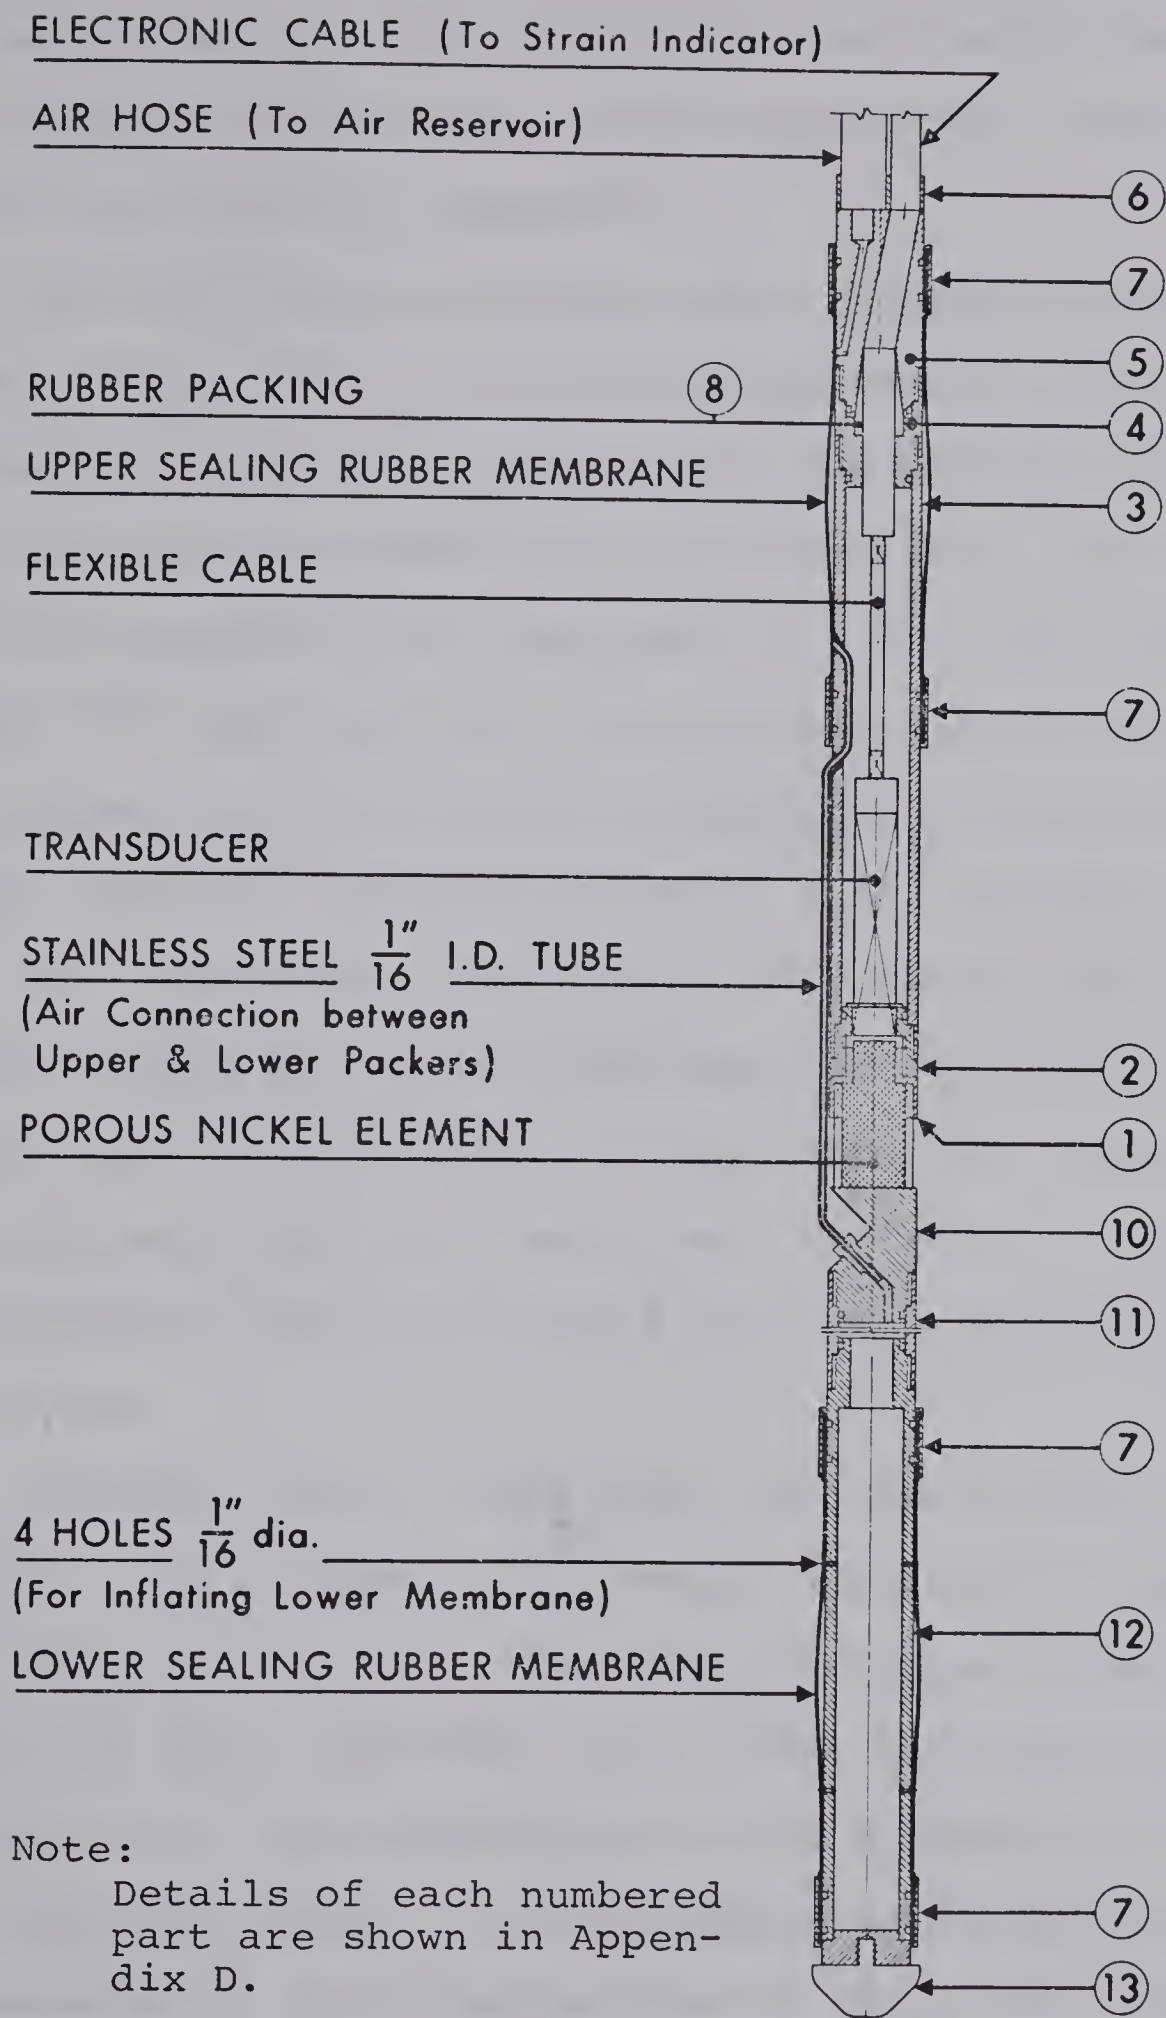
ASSEMBLY DRAWING OF THE UNIVERSITY OF ALBERTA
